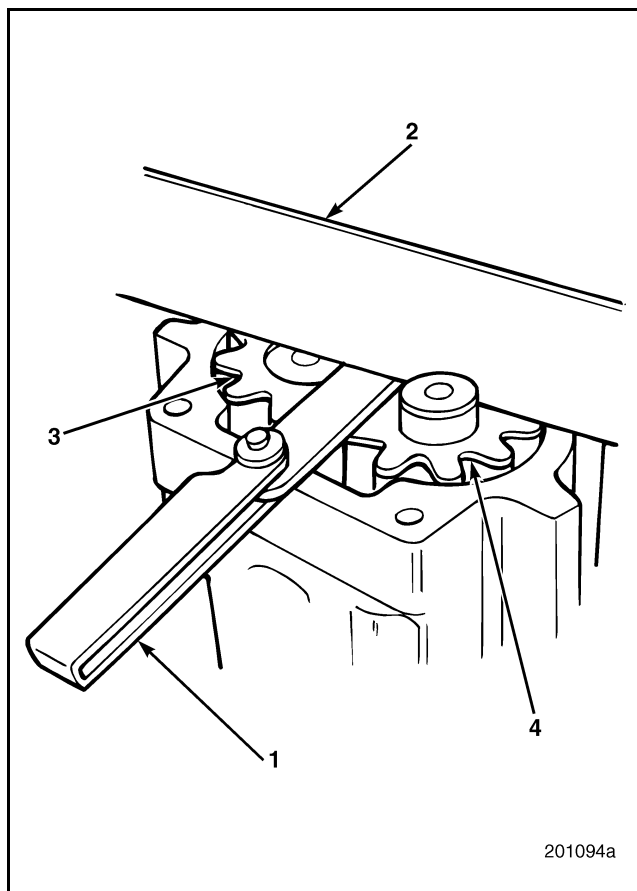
Oil Pump Gear/Idler Gear Assembly End Clearance Check
